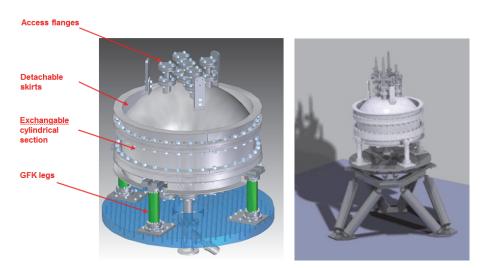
ASL Equipped and Insulated Tank demonstrator design (left), mounted on the hexapod (right)
